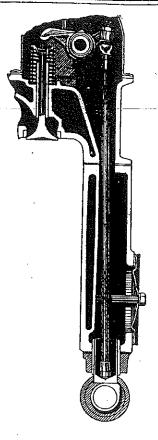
Valve mechanism on 361, 426, 451 and 477 engines
